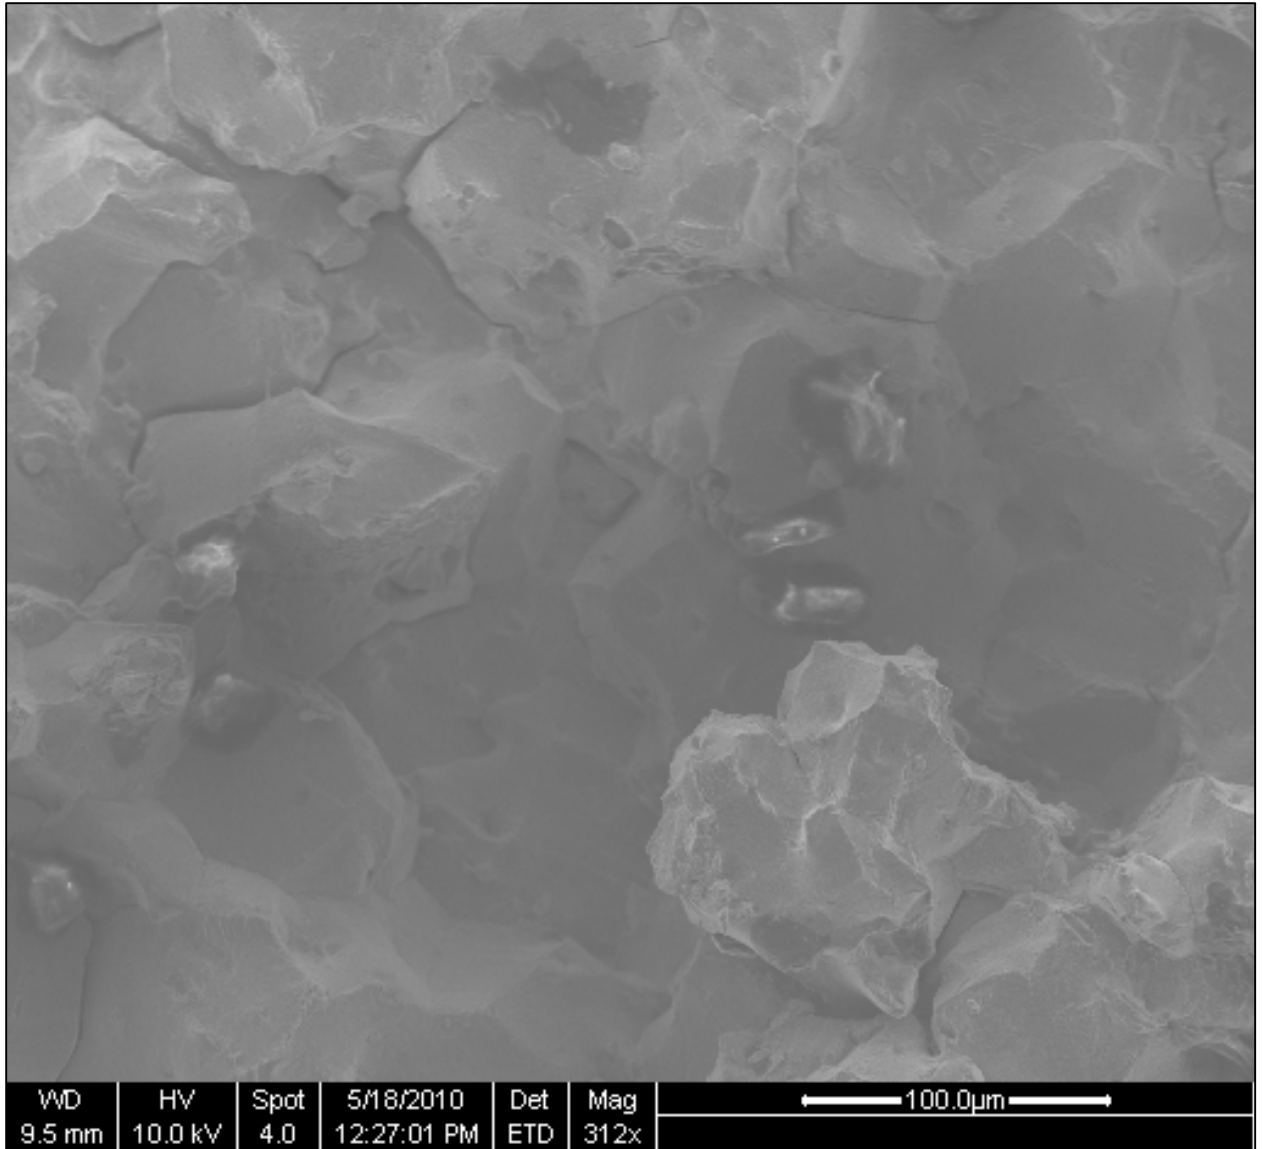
Haynes 230 on-cooling 2202°F fracture surface. Secondary cracking is clearly visible throughout the image.
